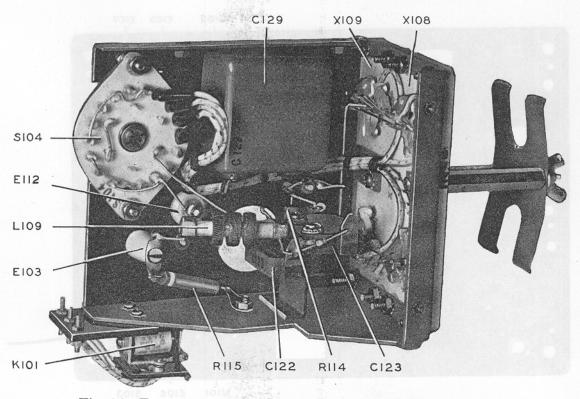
Transmitter Crystal Bracket Assembly—Bottom View
